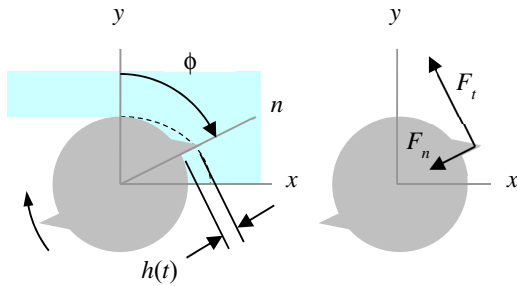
Milling model (up milling is shown, but the model is generic to up or down milling).
